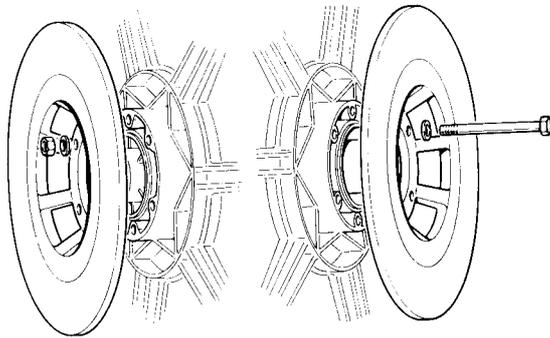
Removing and Replacing the Rear Wheel Brake Discs
